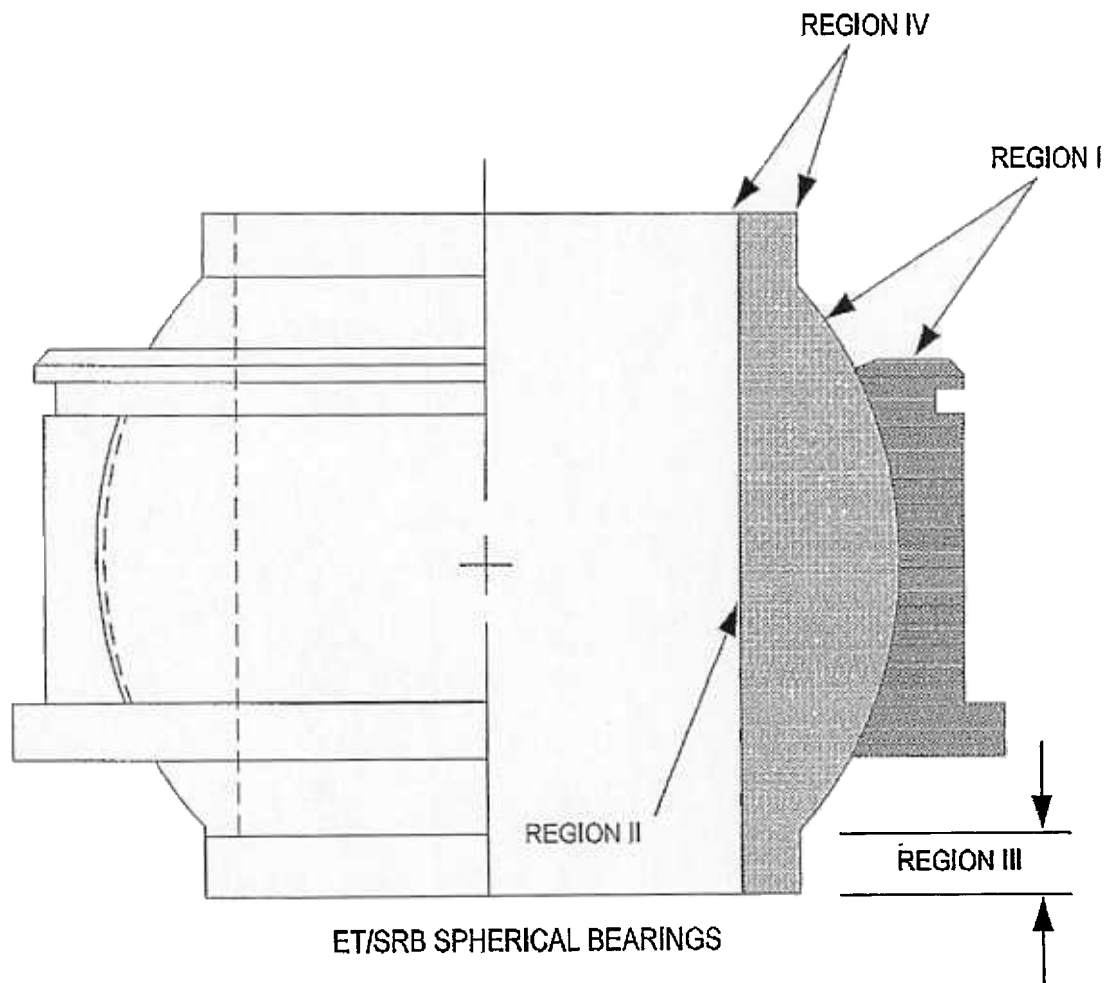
ET Spherical Bearing Inspection Regions (Ref. Only)
